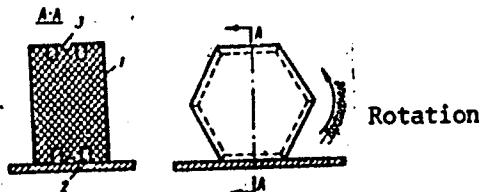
1--casing; 2--metal electrodes; 3--recess
